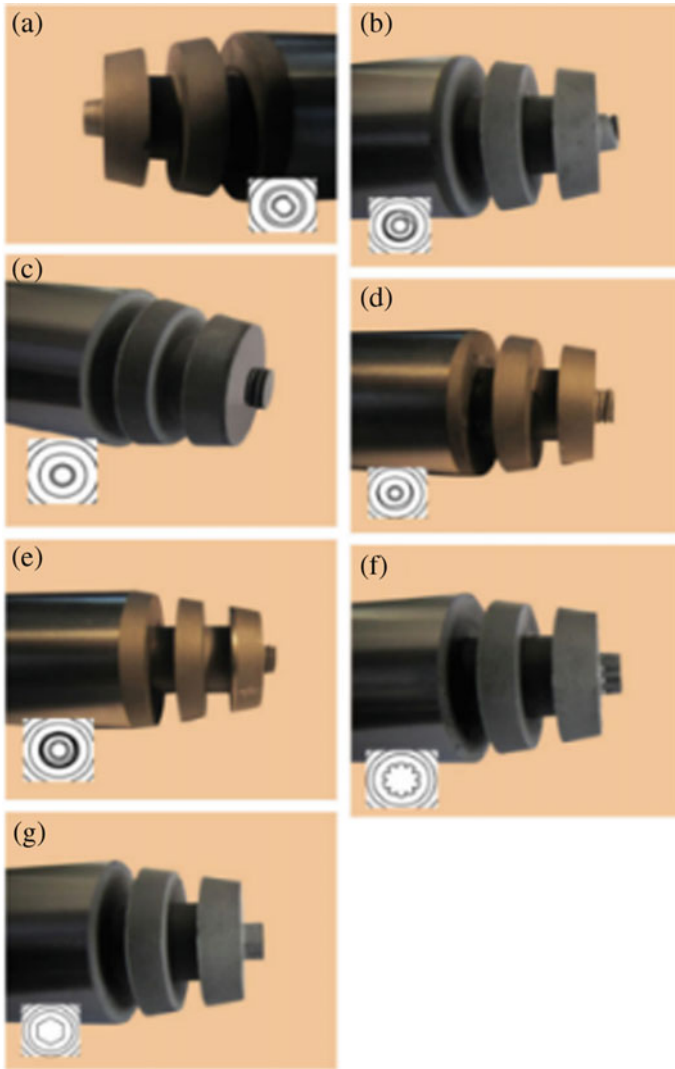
Various tools: a taper with chamfer, b taper with single-thread, c flutes (03), d threaded cylinder, e taper with threads, f spline, g hexahedron [14]
